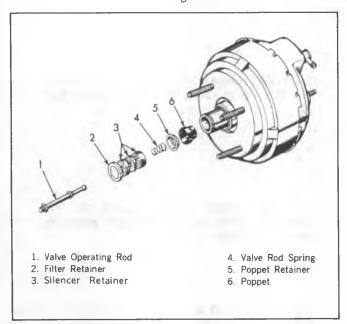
C-Removing Valve Operating Rod, Retainer, Filters and Poppet
